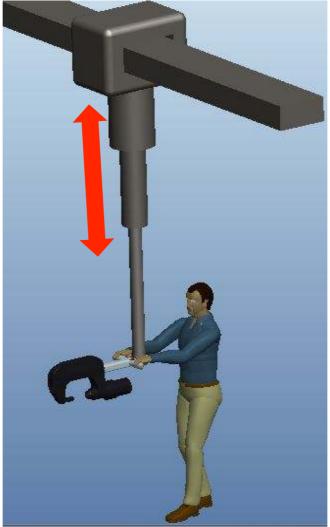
Concept design of the rivet tool for the short term solution at the VIP-cross member subassembly line
